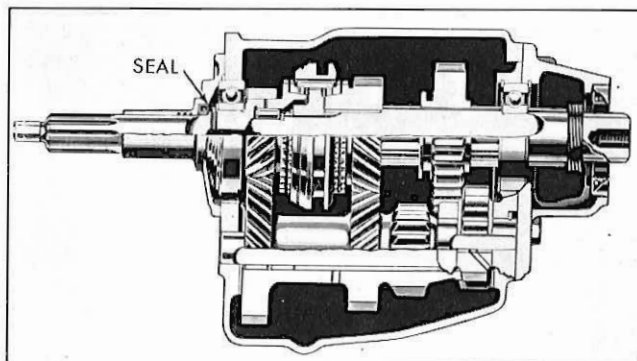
Redesigned Clutch Gear Bearing Retainer
